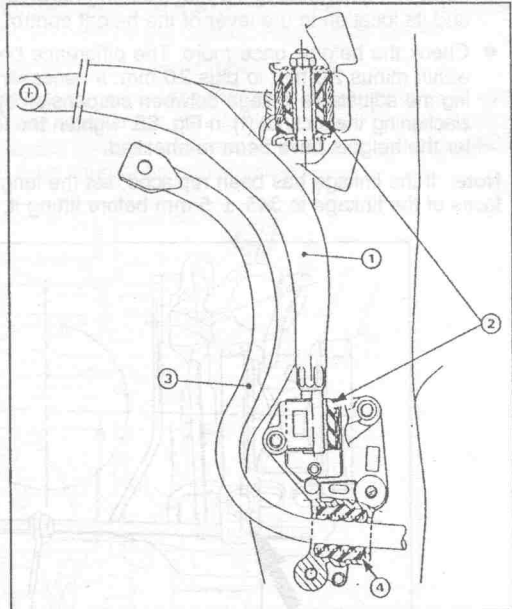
View of the front suspension arm and stabiliser bar attachments see from below.
